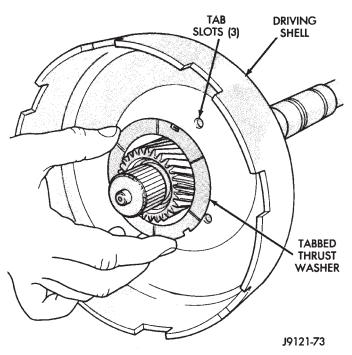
Installing Driving Shell Thrust Washer—46RH
